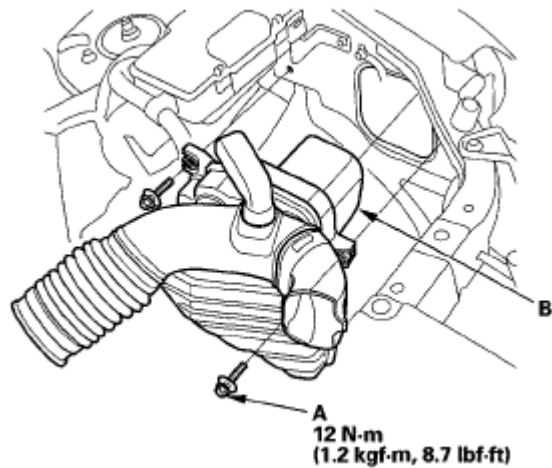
Identifying Resonator And Bolts With Torque Specification
